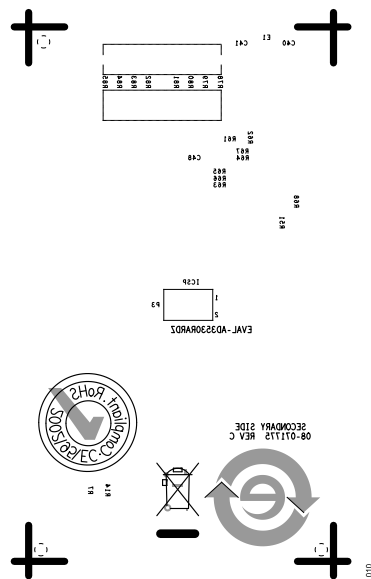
EVAL-AD3530RARDZ Bottom Side Component Placement
